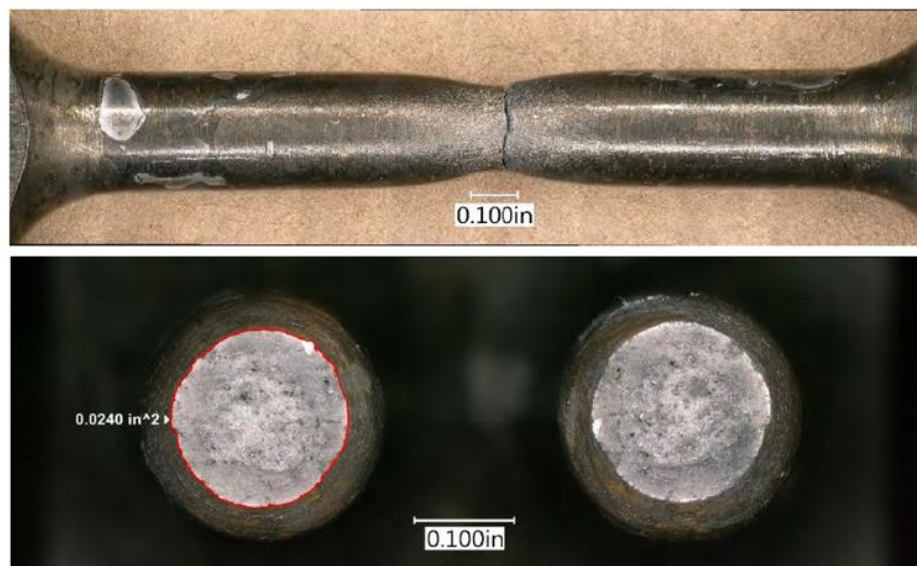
Photographs of Tested Tension Test Specimen QT-16 and Corresponding Fracture Surfaces – Base Metal Plate, Heat No. B4197-2, Transverse Orientation, 300°F
